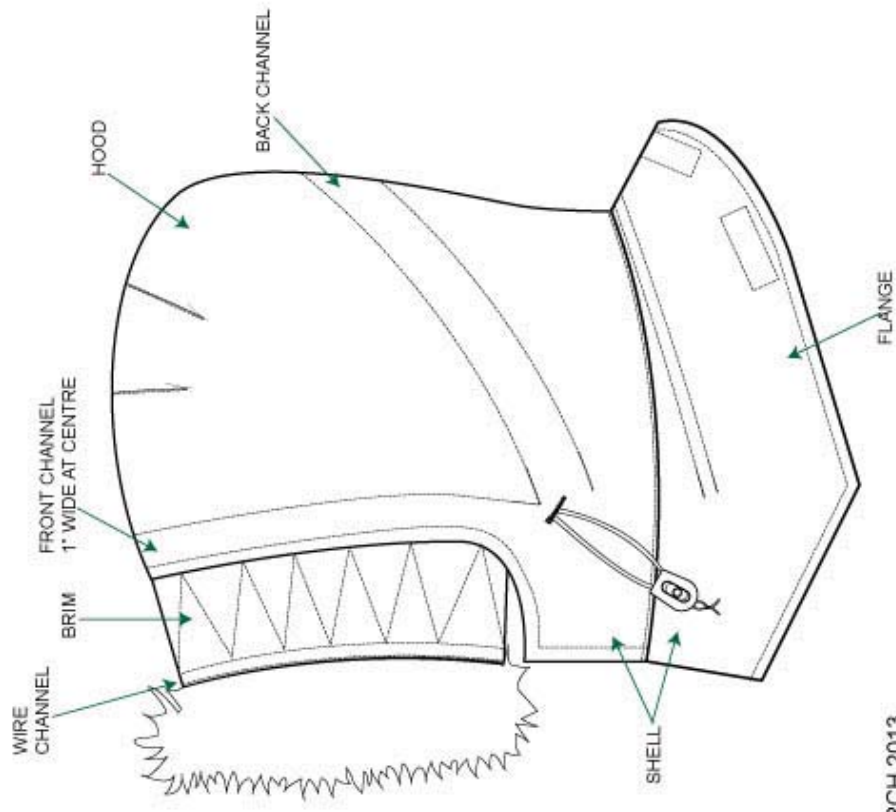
HOOD TYPE i - INSIDE VIEW
